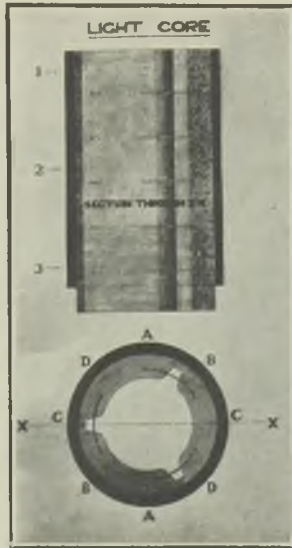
DIMENSIONAL CHANGES IN BUSH CASTING.
